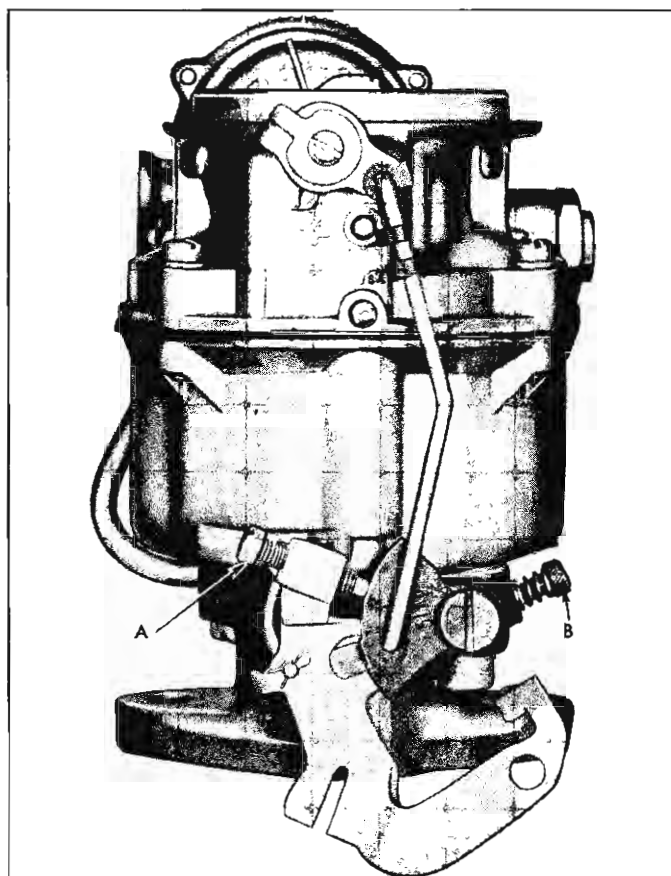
Idle Speed and Mixture Adjustments—Six Cylinder Carburetor
